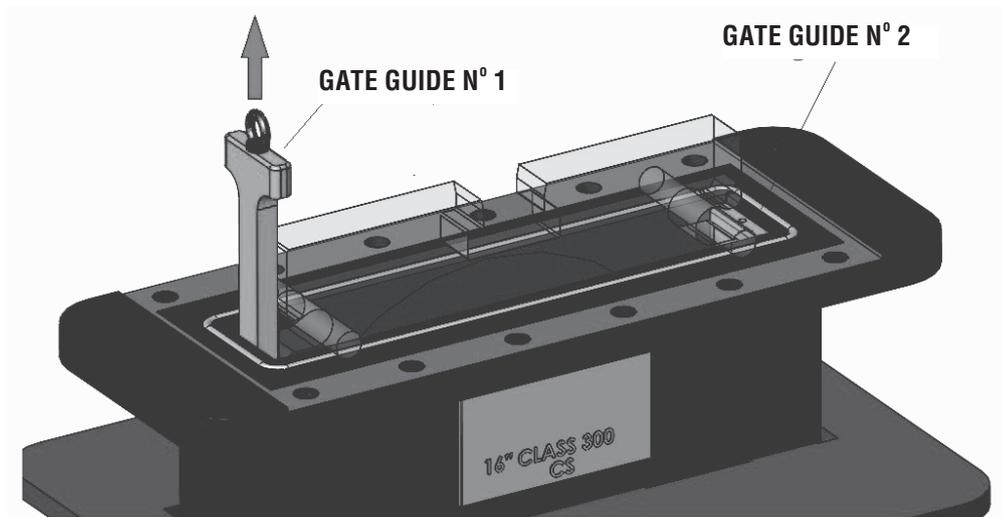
Slab gate disassembly according to steps n° 12, 13 and 14.
